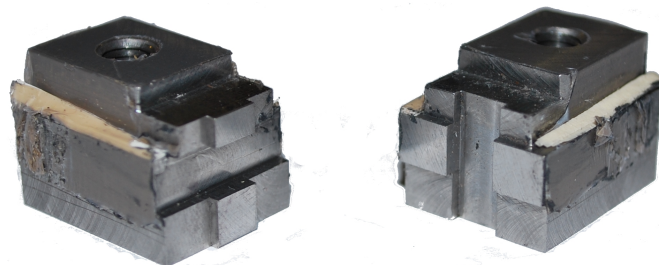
Photograph of the lower glue jig clamp. The piece is comprised of two halves which key together to ensure accurate vertical and horizontal alignment.
